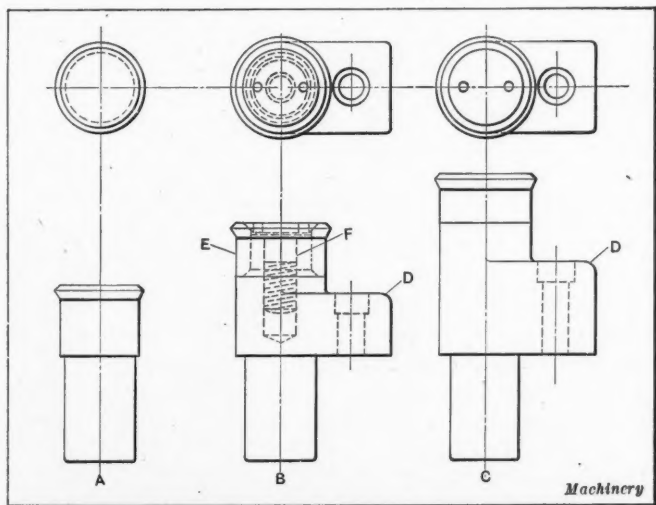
Locking Points or Stops used in Fixtures shown in Figs. 10 and 11
